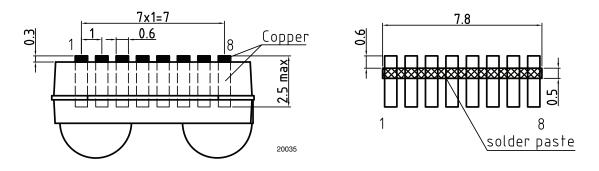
Recommended Footprint for Side View Applications and Solderpaste Mask
